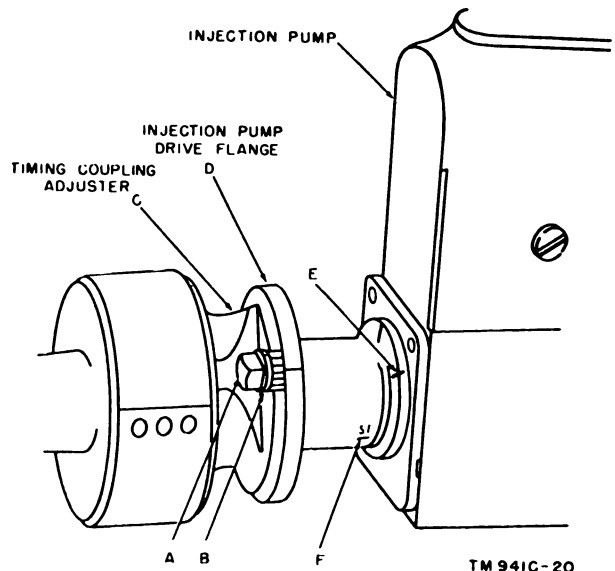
Power Unit PE-215-E—*injection pump drive.
